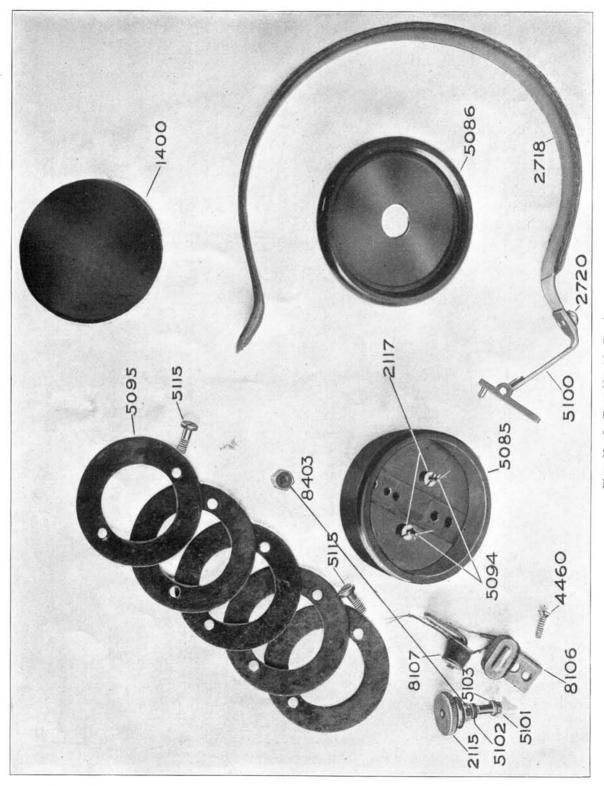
Type No. 14—Receiver Two pieces are used instead of five (No. 5095), the piece number being 13602
